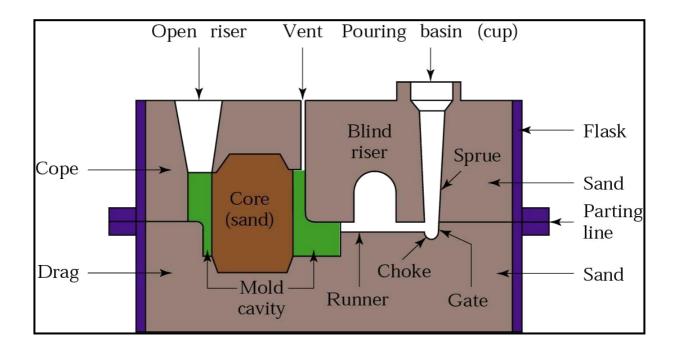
Cross section of a typical two-part sand mold, indicating various mold components and terminology.
